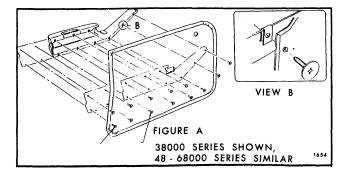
Arm Rest to Door Trim Pad Installation
